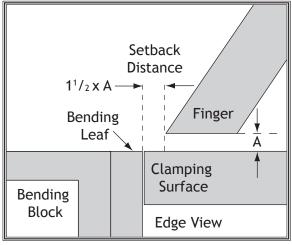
Determining setback distance for workpieces 22 gauge and thinner.
